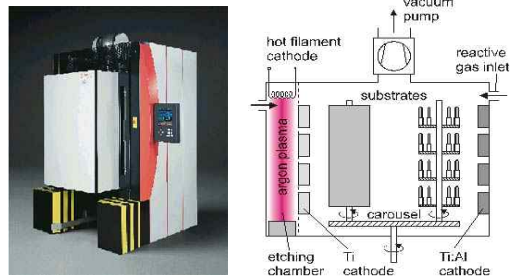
Balzers BAT1200 coating system and PVD coating mechanism.
